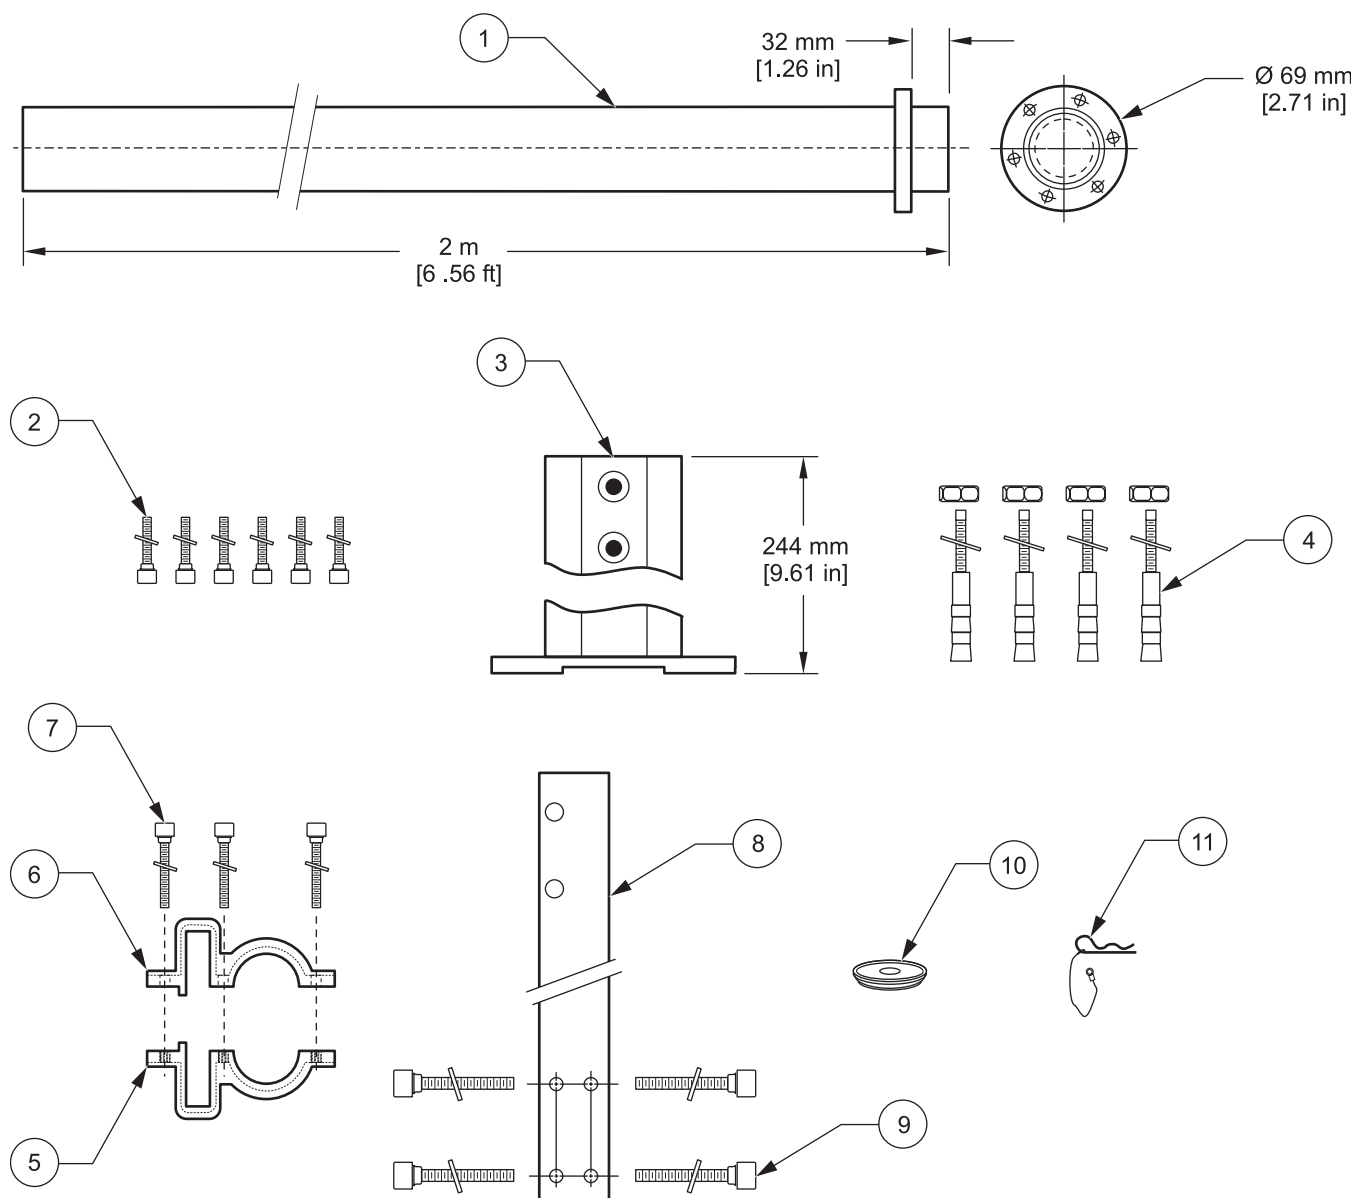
Fixed-point Mounting Parts (Cat.No. LZX414.00.50000)
